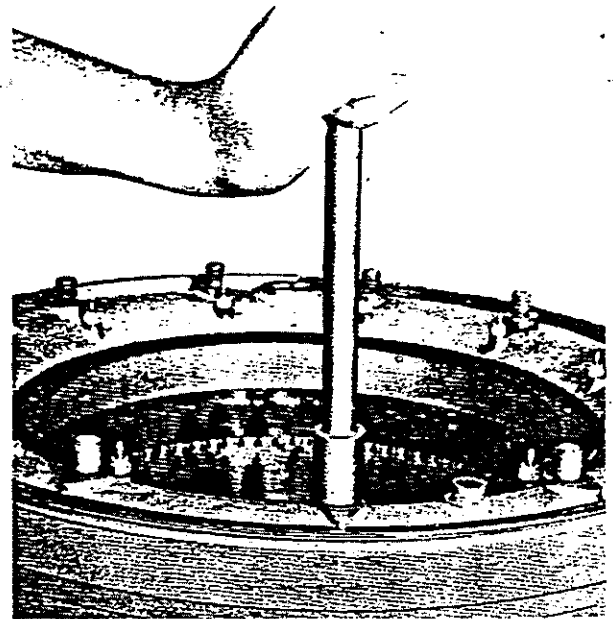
Removing Fuel Vaporizer Tube Locking Nut
